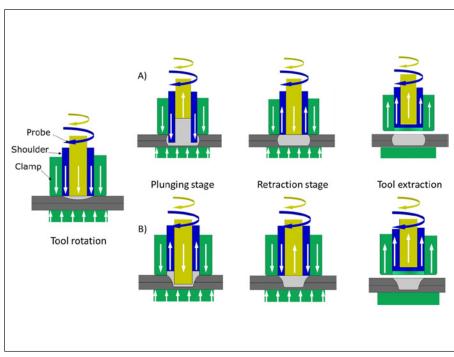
• Schematic drawing of the RFSSW process (TWI, 2018): A) Shoulder-plunge variant, B) Probe-plunge variant.
